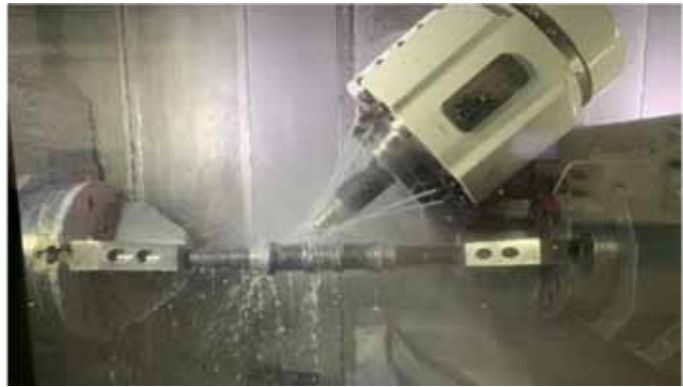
& 4: Toolpath Simulations & Machining Between Spindles
